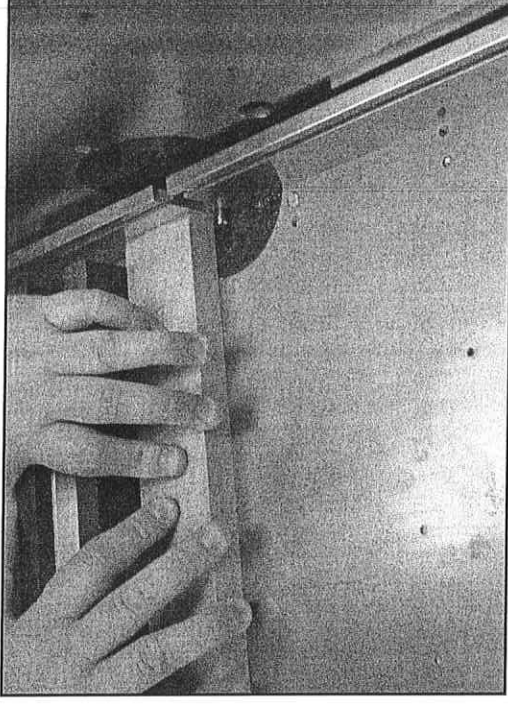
For cutting the front and back, the table is set to 90° and the depth is adjusted equal to the router bit diameter.
